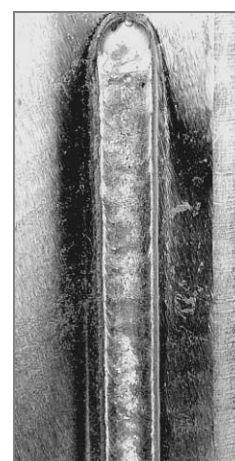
(right): Bead appearance made in straight-run vertical-up fillet welding, having a smooth regular surface with no undercut (Brand: DW-81B2; Wire size: 1.2Ø; Welding current and voltage: 220A (DCEP)/25V; Shielding gas: 75%Ar+25%CO₂; Leg length: 7 mm)
